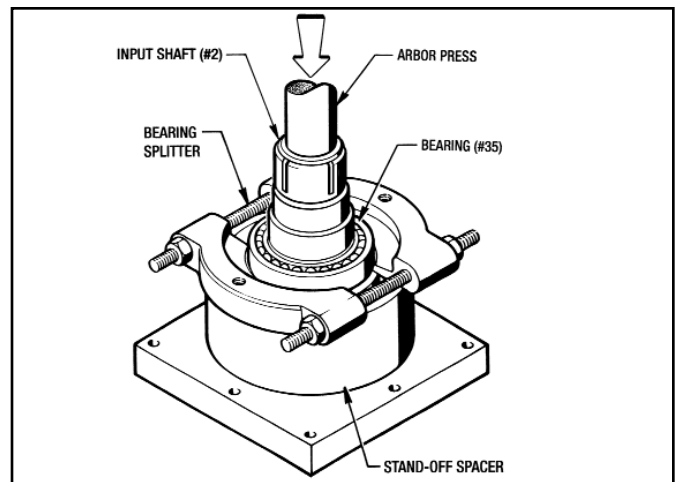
Removing Bearing (#35) from Quill Input Shaft
